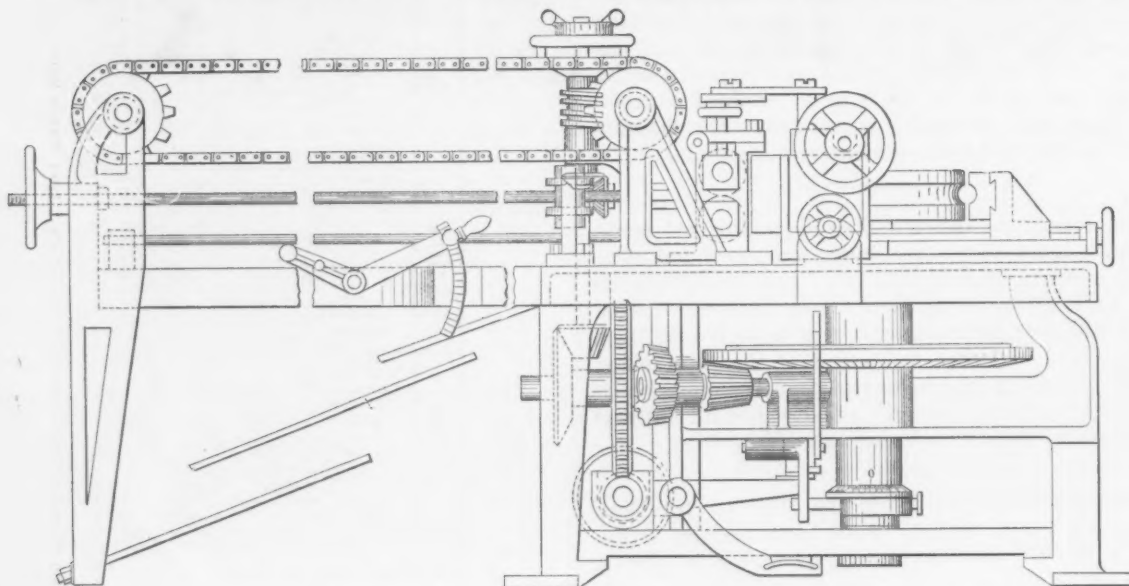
Elevation of the Complete Machine Shown in Part in Fig. 1.
